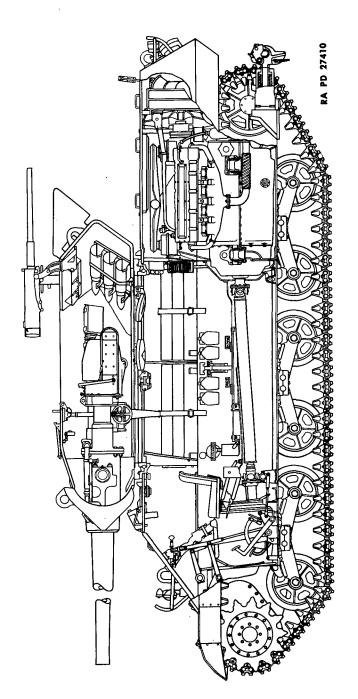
Inch Gun Motor Carriage M10A1-Longitudinal Section
